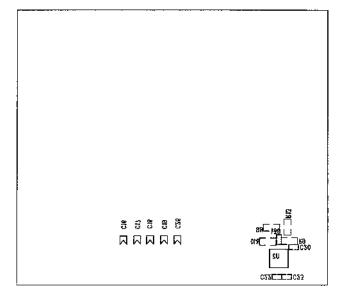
Printed Circuit Board Bottom Side Silkscreen
